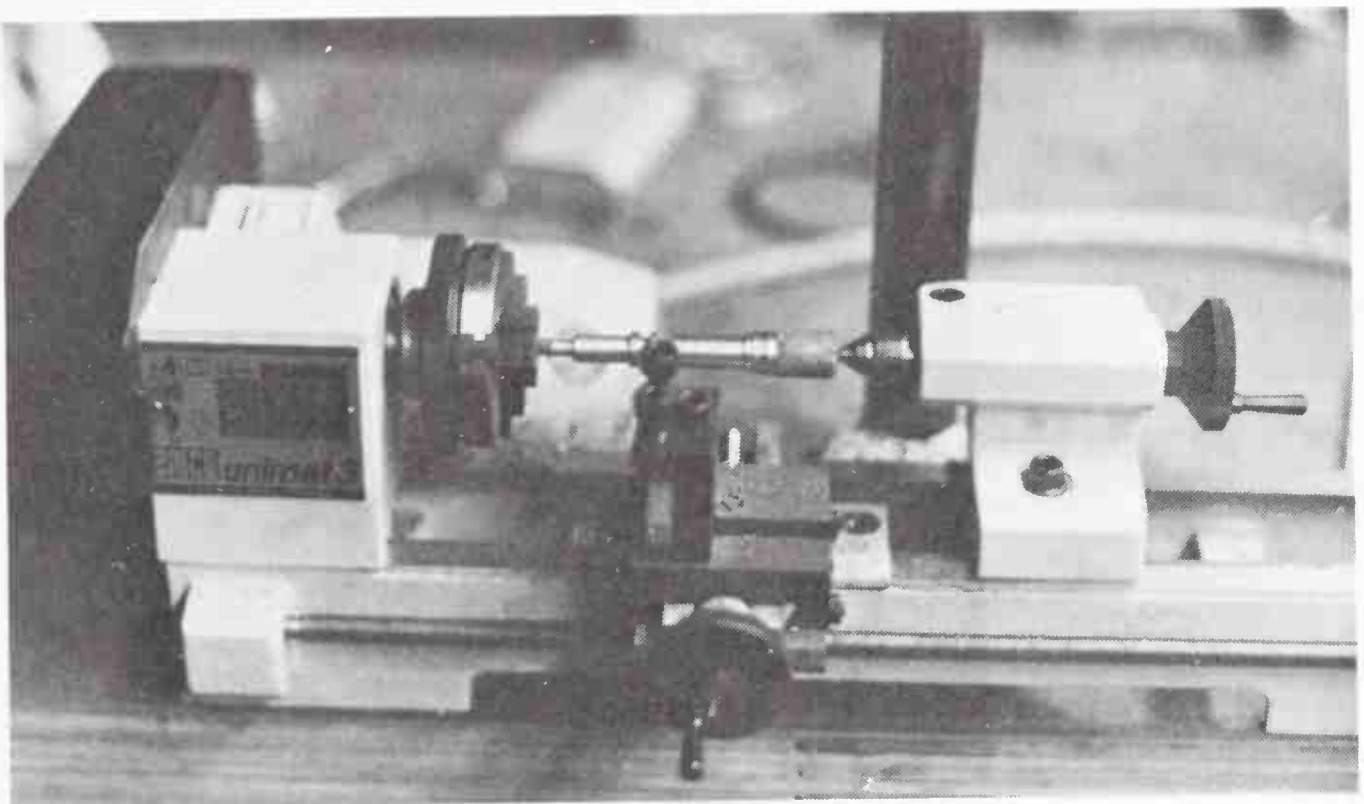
Unimat 3 lathe set up for turning firing pin.
